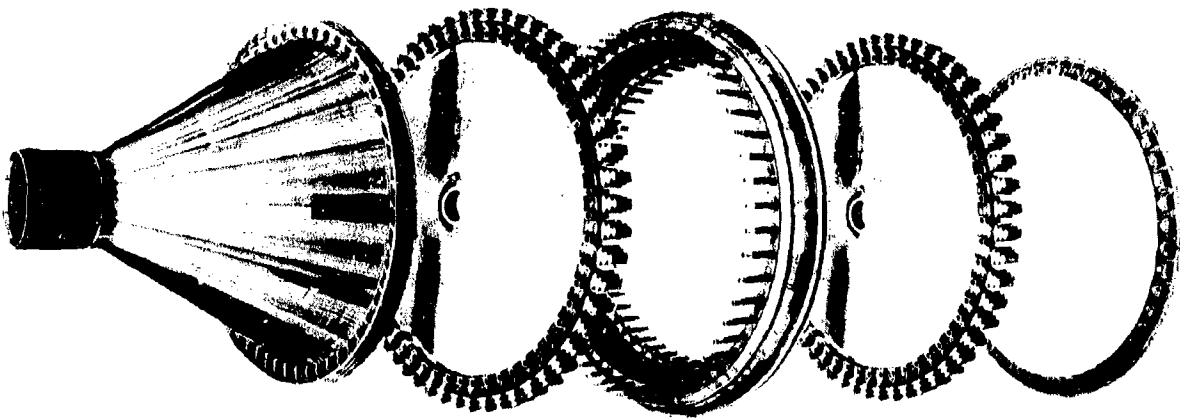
TURBINE ROTOR EXPLODED ASSEMBLY VIEW. Photographs of the GE4 turbine rotor drum. Fewer parts and large diameter, stiff structure assure ruggedness and durability for thousands of hours of continuous service.
